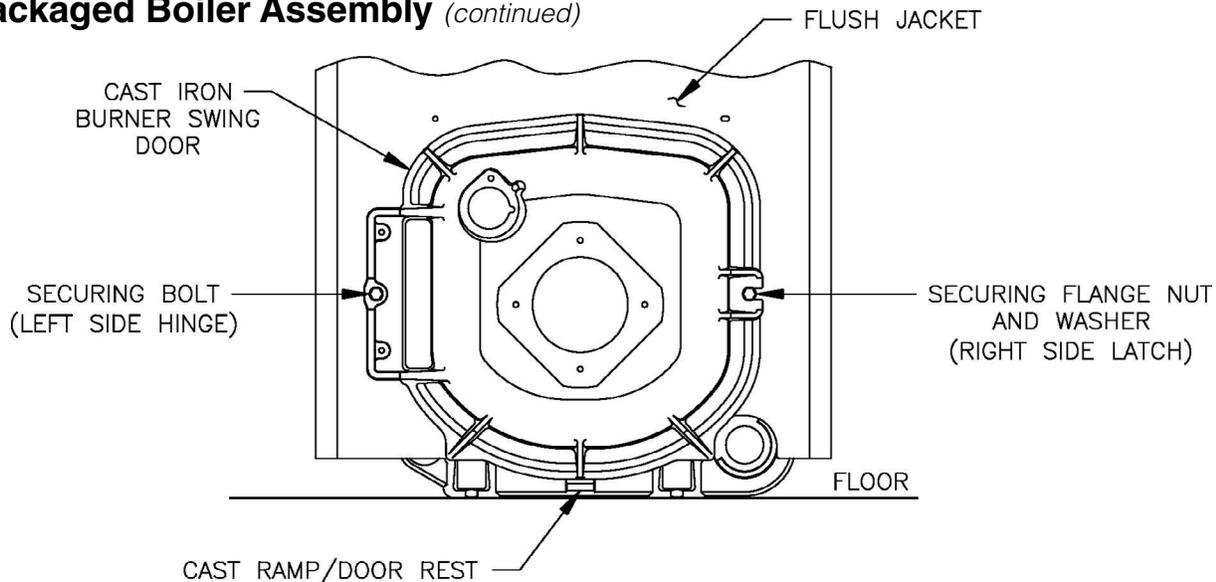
Partial Front View - Burner Swing Door Mounted to Boiler - Fully Closed and Secured
